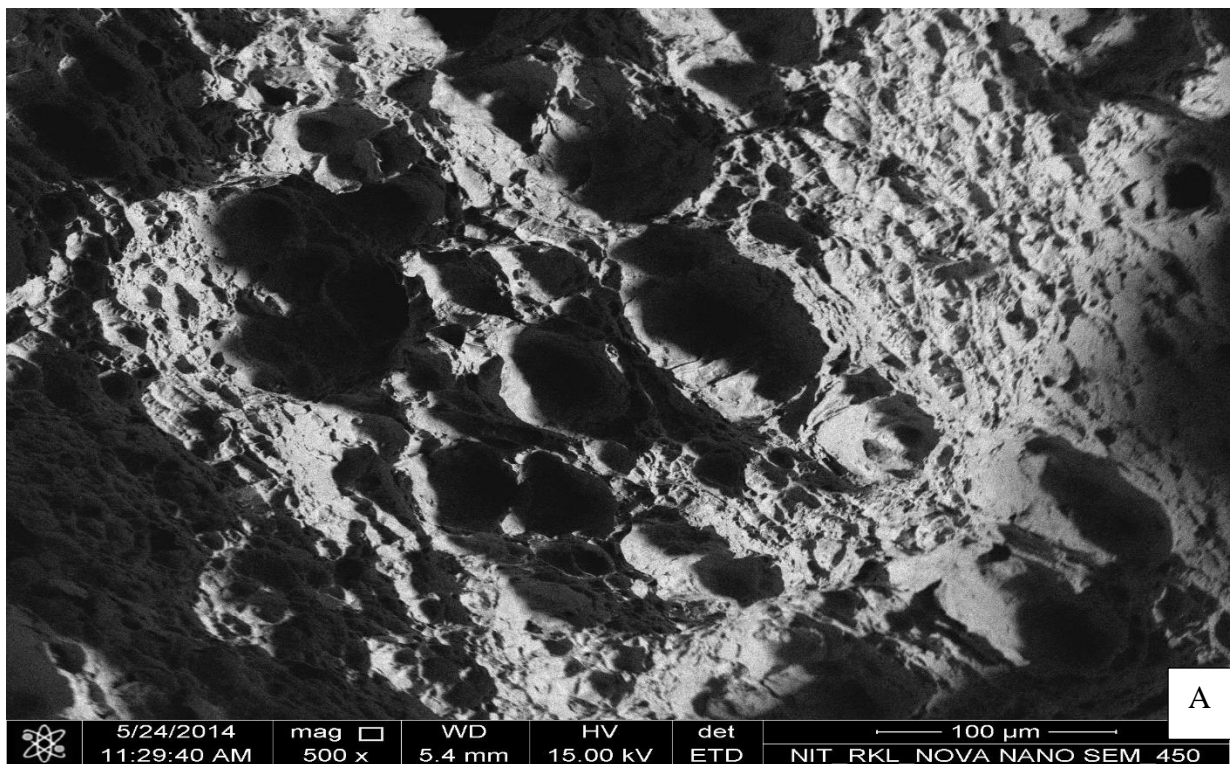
Typical fracture surface and various region of CT specimen (JIC-1) after fracture.
